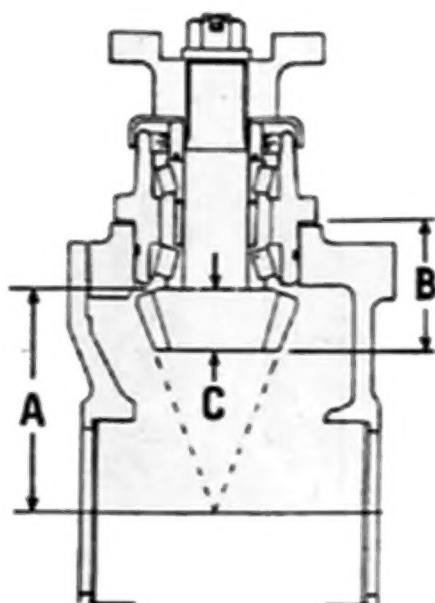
Sectional view of bevel drive pinion assembly installed in differential housing. Measurements A, B and C are used when determining pinion setting. Refer to text.
